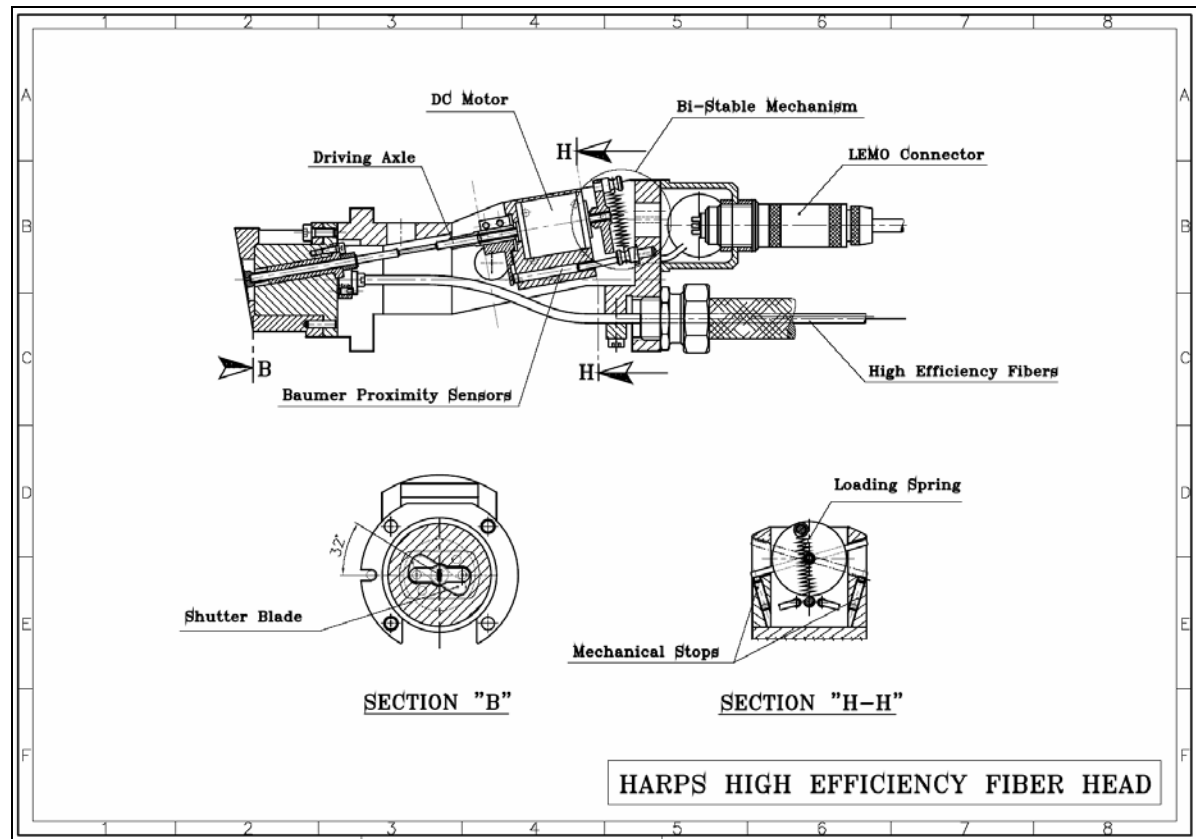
HEFS and Fiber Head Mechanical Drawing
